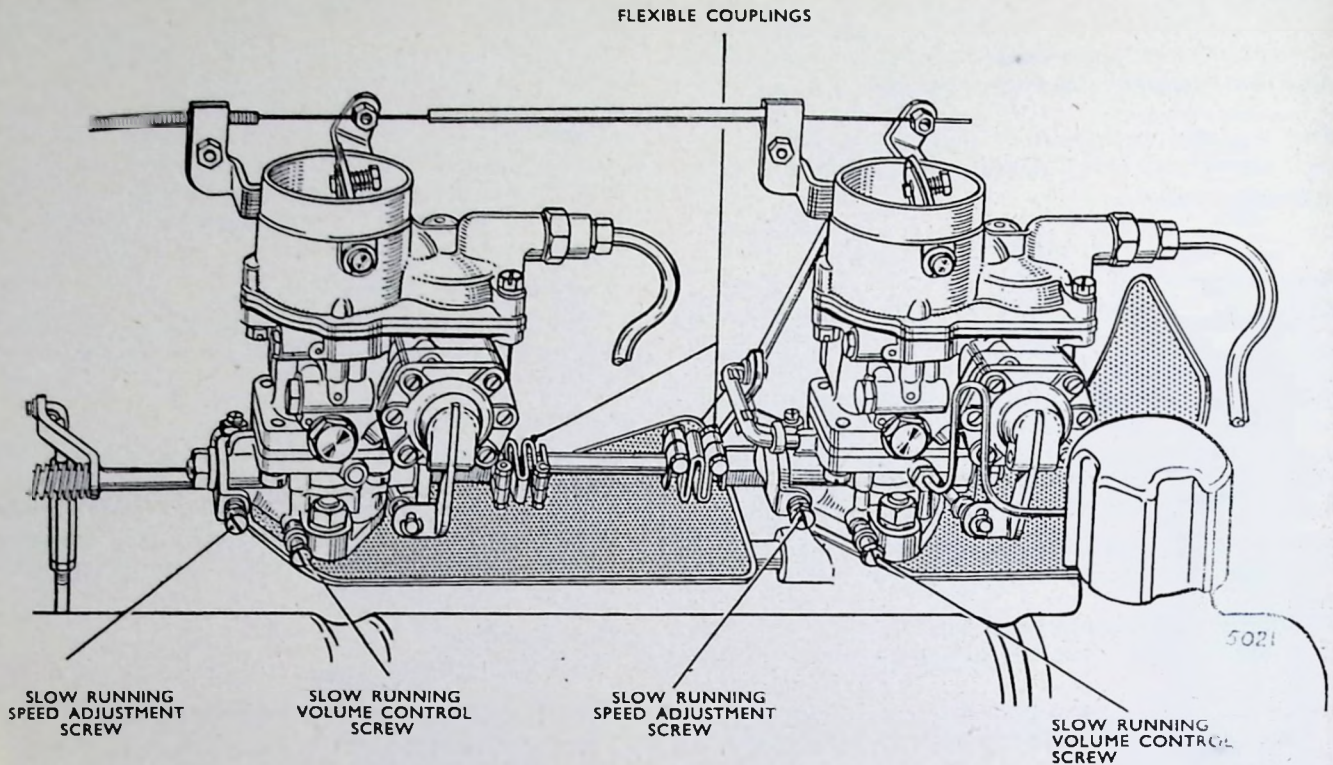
Adjustments for synchronising the throttles and adjusting slow running (twin carburetters).
